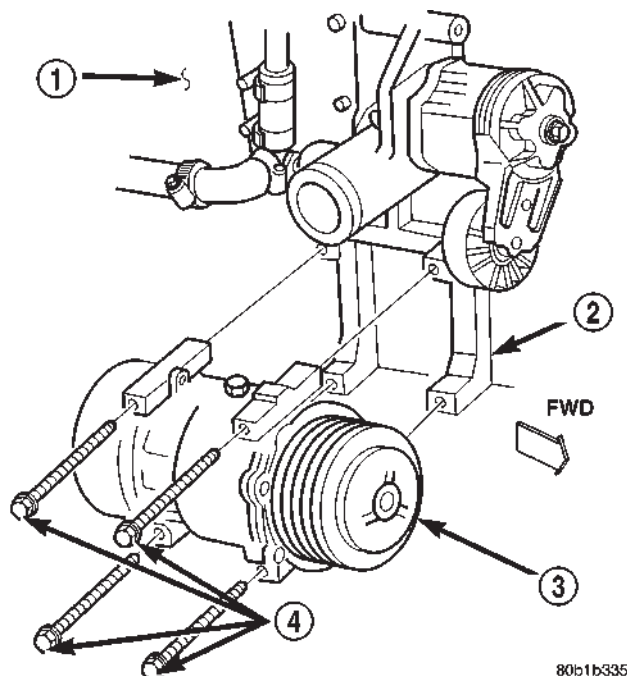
COMPRESSOR REMOVE/INSTALL - DIESEL ENGINE
